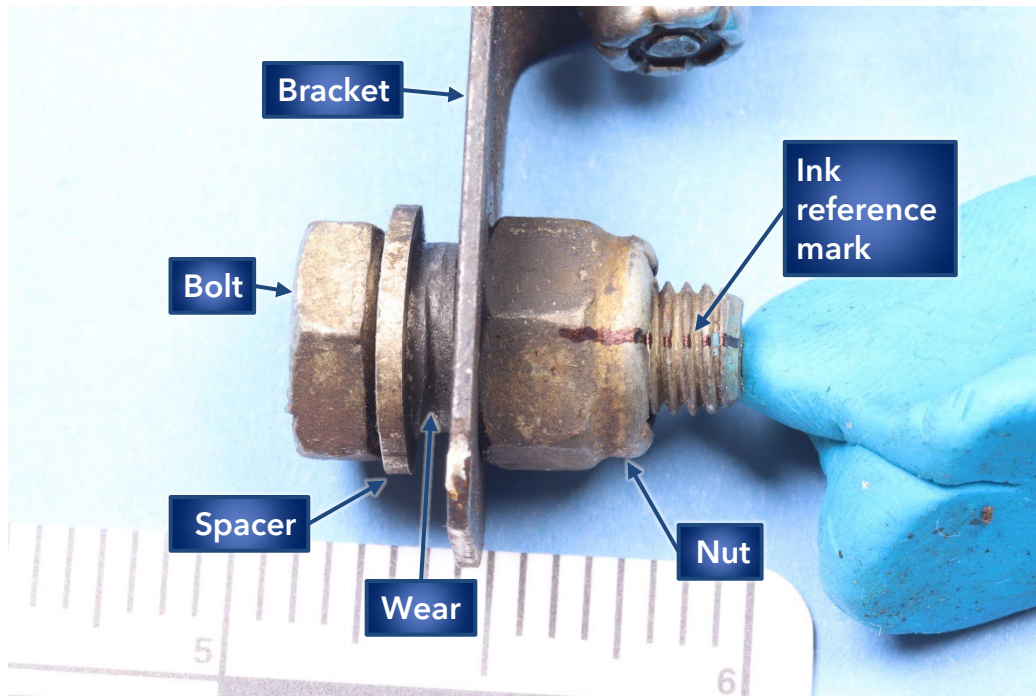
Elevator trim control cable piece and trim tab attachment bracket with associated hardware as received.
